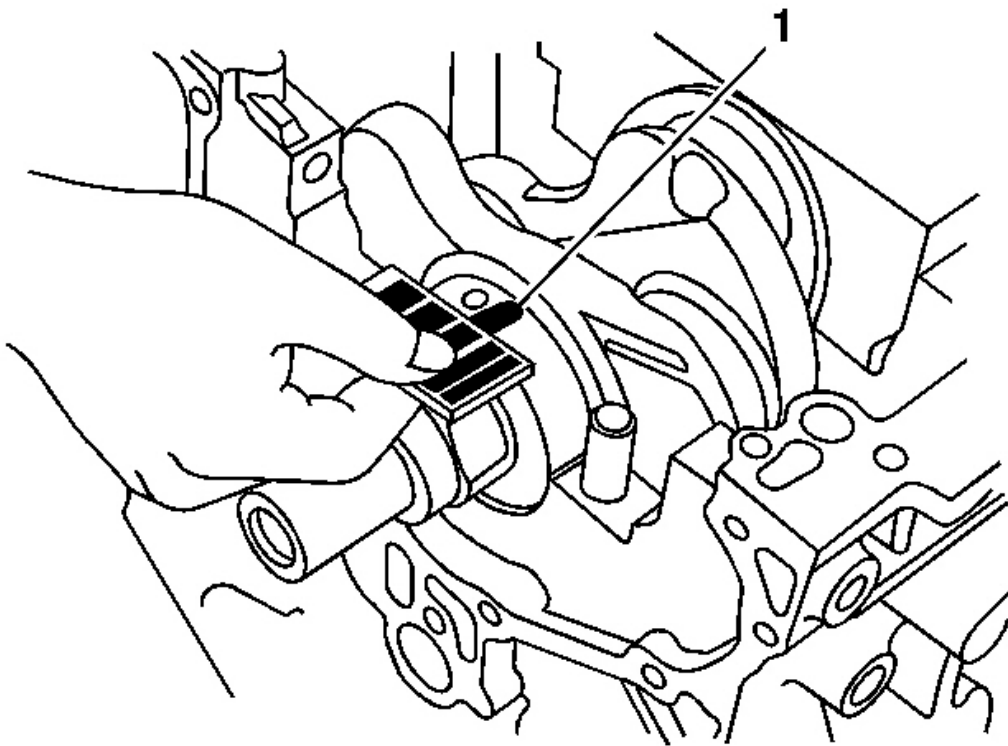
Measuring The Widest Part Of The Plastic Gaging Material
